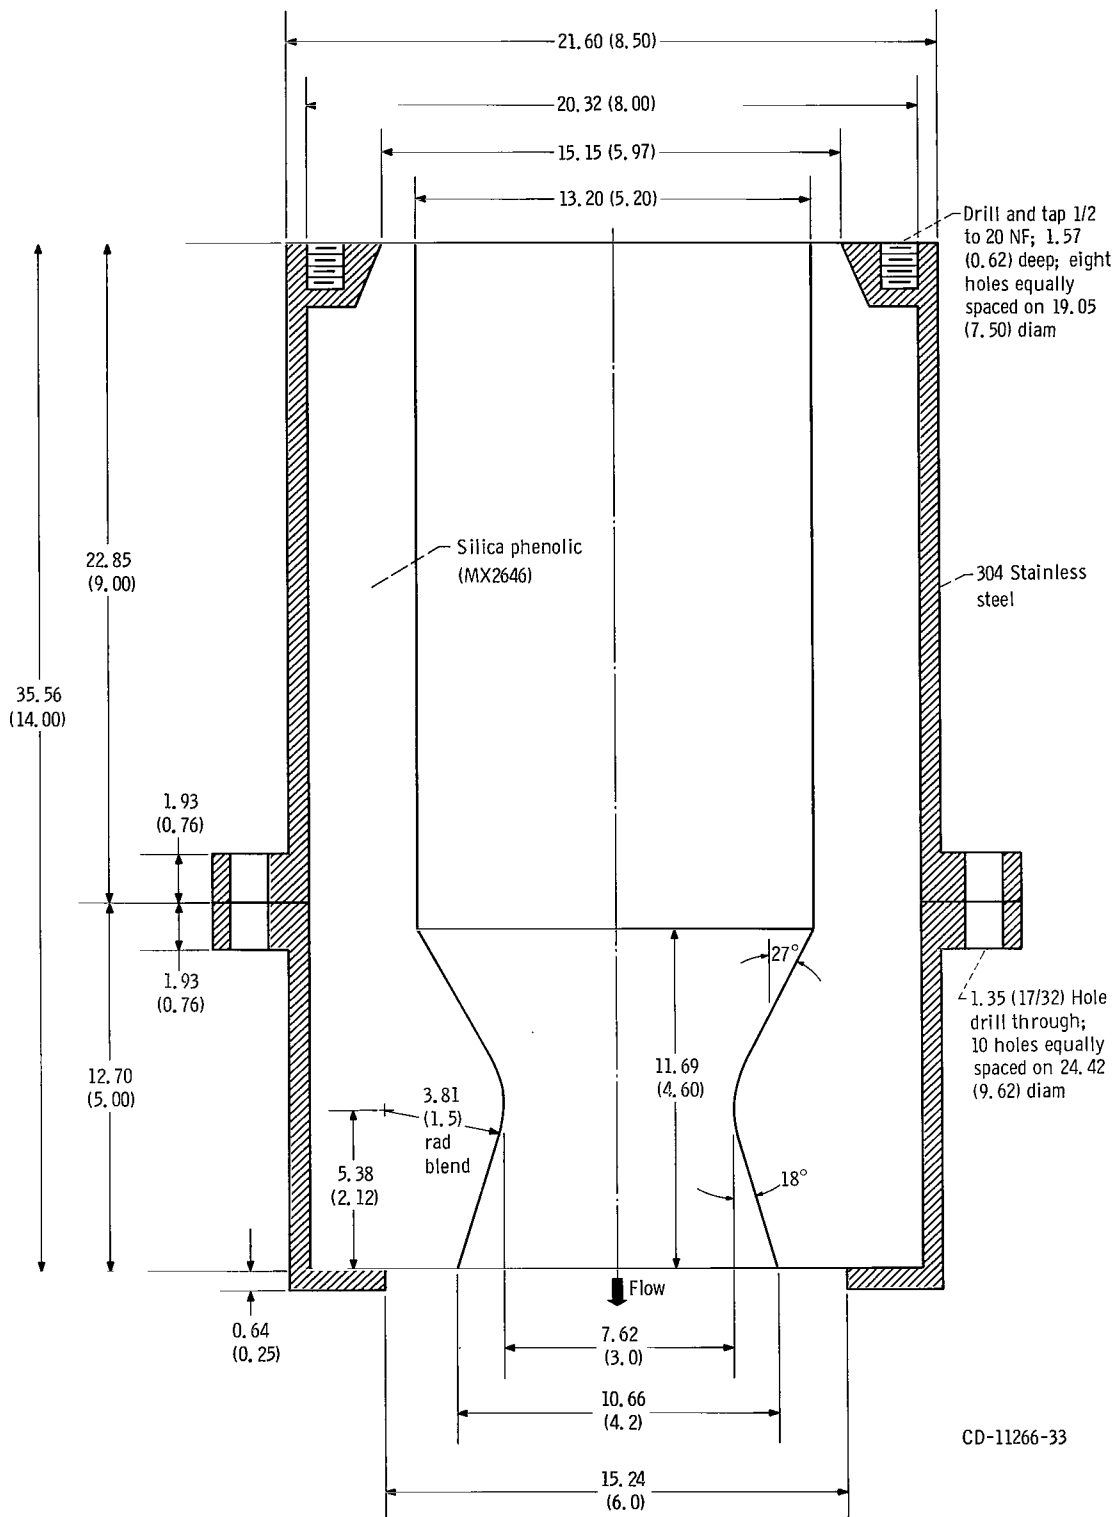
Ablative thrust chamber. (All linear dimensions are in centimeters (in.).)
